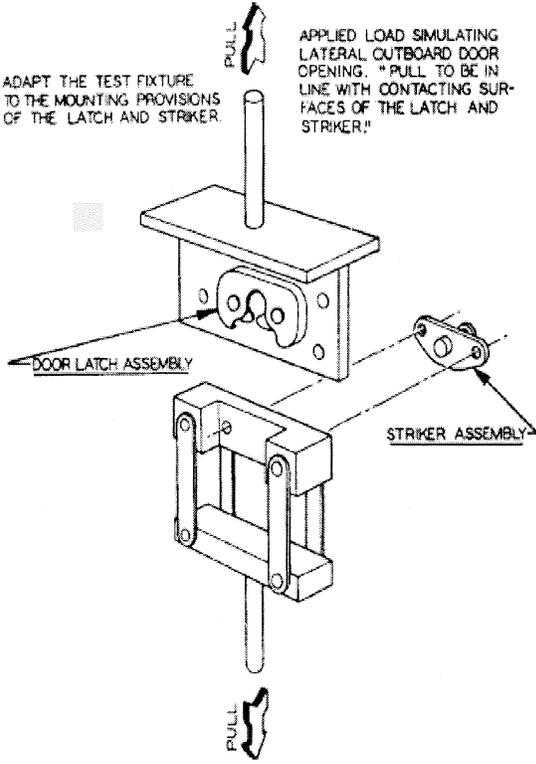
Door Latch – Tensile Testing Fixture for Load Test 2
